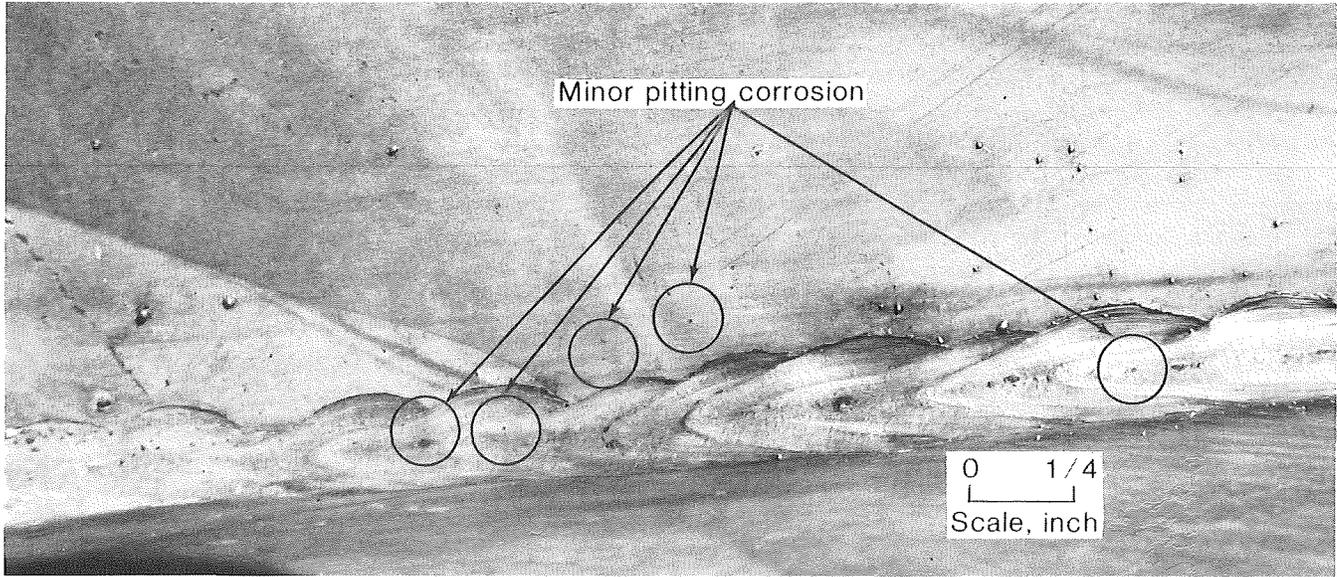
Minor pitting corrosion on and adjacent to welds.
